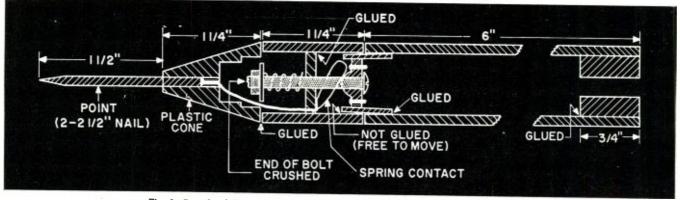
Details of the author's version of the multi-purpose probe, fully assembled.
